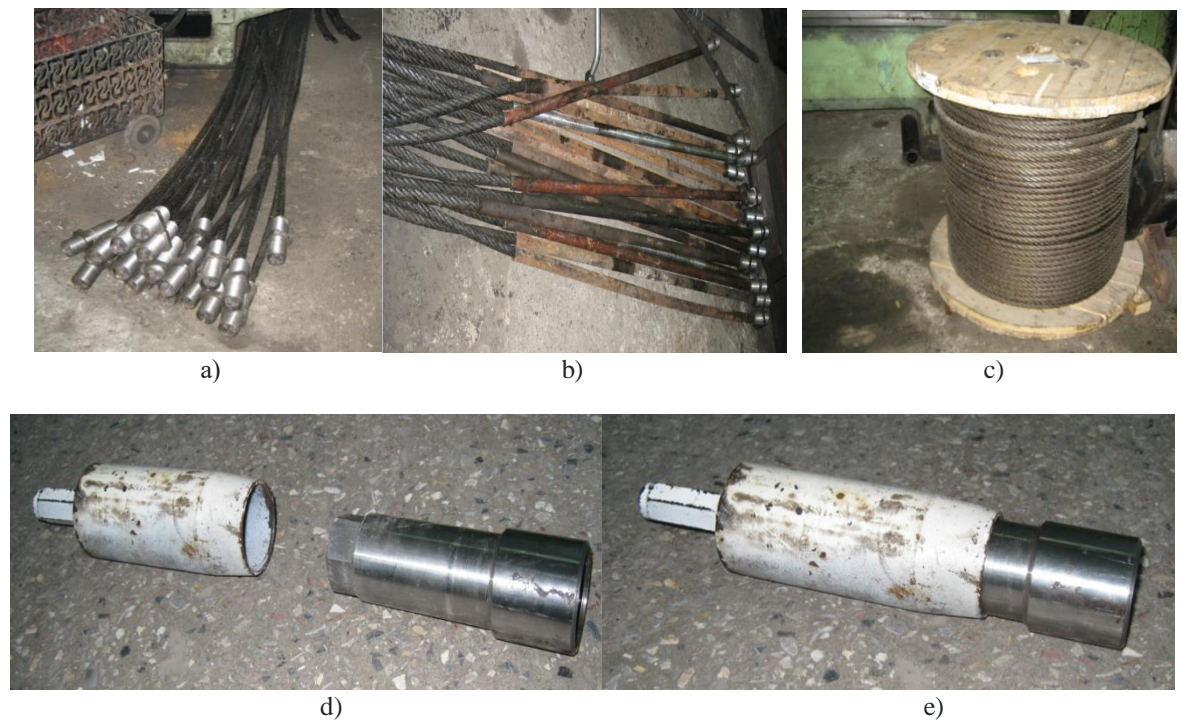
Manufacturing rope anchors at Mashzavod No. 1 (a); a rope (b)
